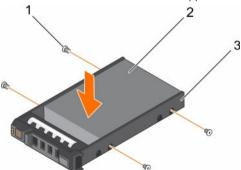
Installing a hot swappable hard drive into a hot swappable hard drive carrier
